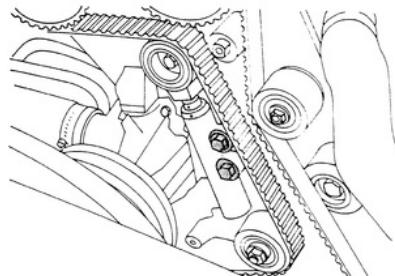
Check the timing belt idler pulleys for wear or bearing noise; replace if necessary
